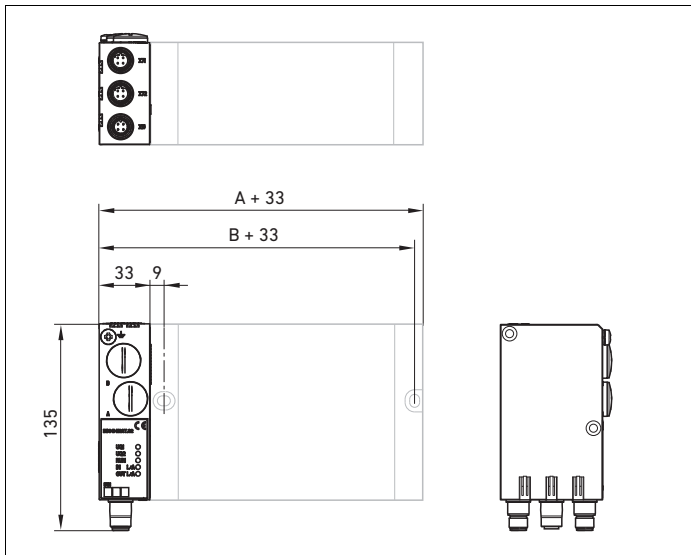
Dimensioned drawing of the valve system (bus coupler and valves)
